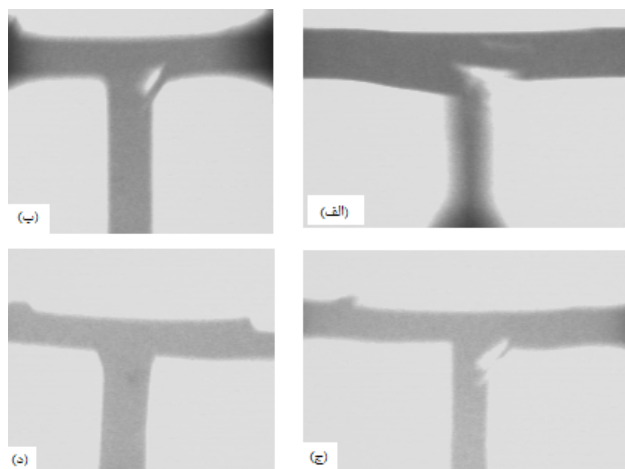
Radiograph picture from top surface of joints which welded by (a) 0, (b) 0.5, (c) 1 and (d) 1.5 mm tool offset
